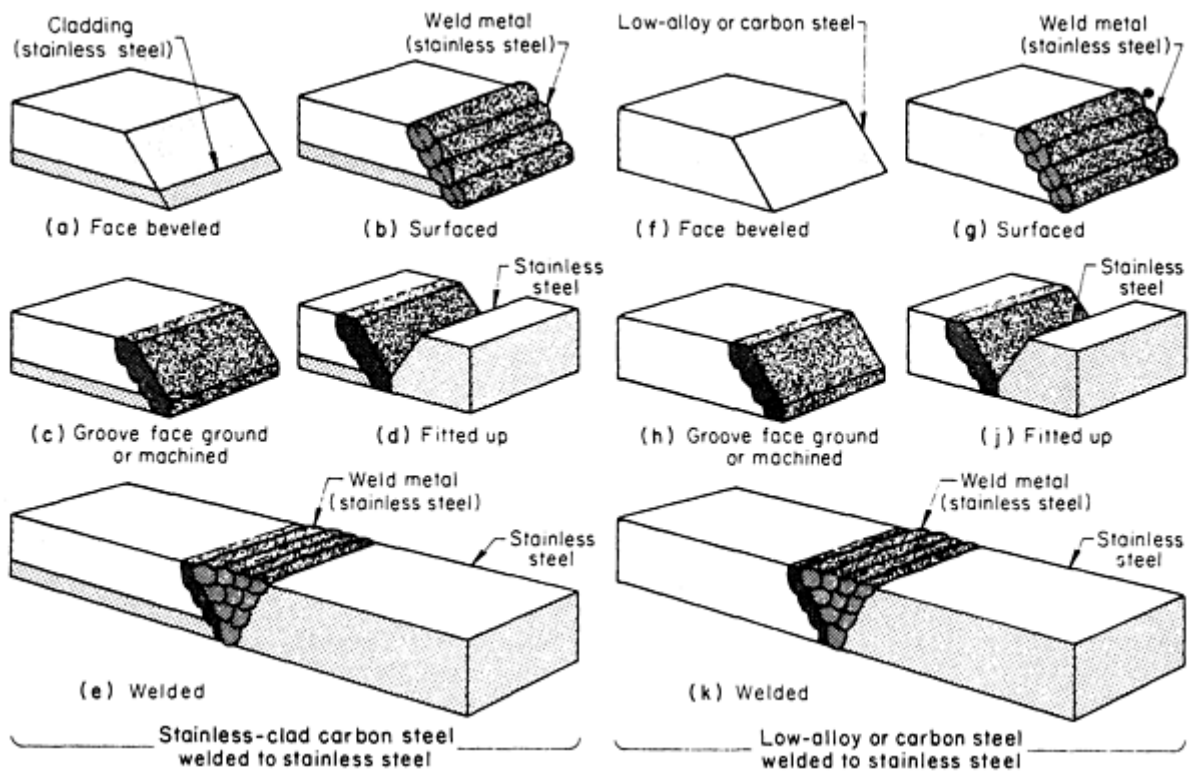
PROCEDURES FOR JOINING AUSTENITIC STAINLESS STEEL TO STAINLESS-CLAD CARBON STEEL, CARBON STEEL, AND LOW-ALLOY STEEL. STAINLESS-CLAD, LOW-ALLOY, OR CARBON STEEL EDGES ARE BEVELED FOR WELDING (A AND F). AN OVERLAY (OR "BUTTERING" LAYER) OF STAINLESS STEEL FILLER METAL IS APPLIED TO THE BEVELED EDGE (B AND G). THE LAYER IS MACHINED OR GROUNDED TO REQUIRED DIMENSIONS AND STRESS RELIEVED, IF REQUIRED (C AND H). THE COMPONENTS ARE FITTED UP FOR WELDING (D AND J). THE WELD IS COMPLETED, USING THE FILLER METAL NORMALLY USED FOR WELDING THE STAINLESS STEEL MEMBER OR THAT USED FOR THE SURFACING PASS ON STAINLESS-CLAD LOW-ALLOY OR CARBON STEEL (E AND K).
